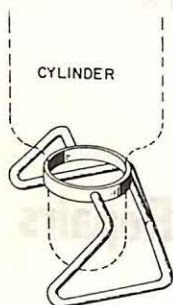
Adapter stand holds supply cylinder in position for charging, prevents damage to cylinder valve.
